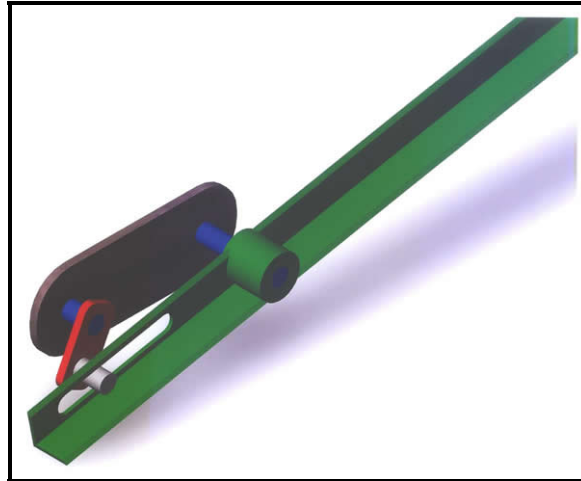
Concept Design for Penguin band mechanism<sup>5</sup>
